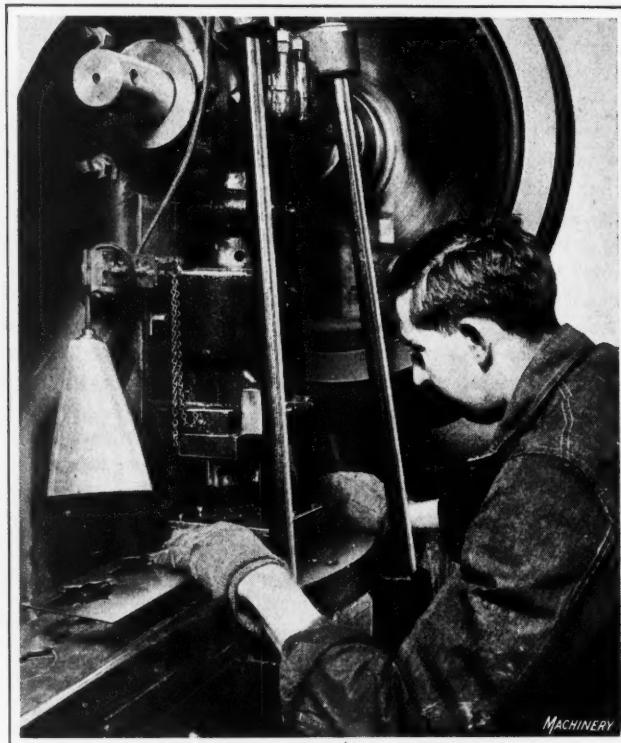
Power Press equipped with Simple Stamping Dies for making the End Plates of Variable Condensers
